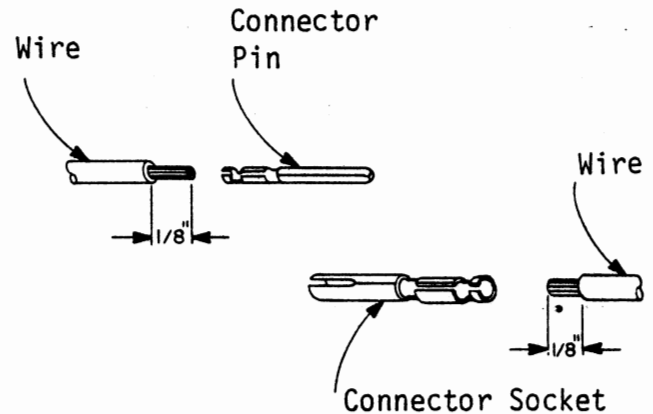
A. Connector Pin and Connector Socket Wire Insertion
